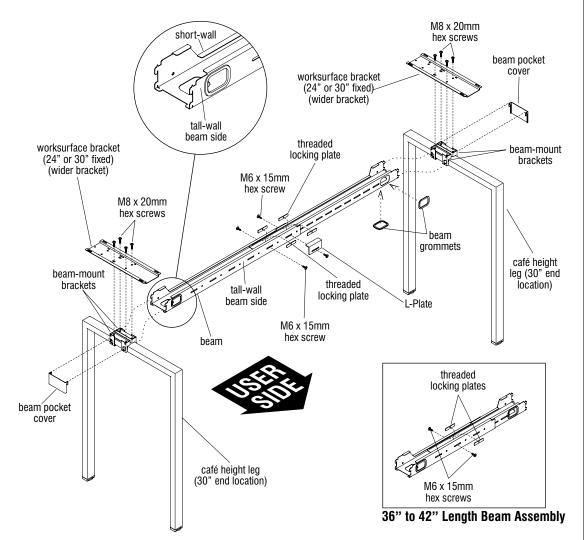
Single-Sided Fixed Café Height Benching Support Legs & Beams
